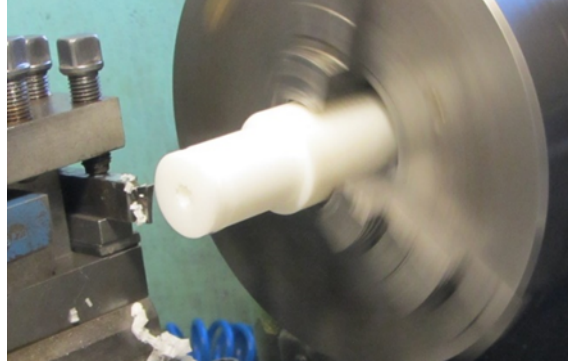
Manufacturing of the piston made of plastic (POM) by machining on lathe.
